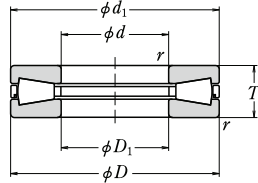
Thrust Tapered Roller Bearing in Heavy Duty Extruder
